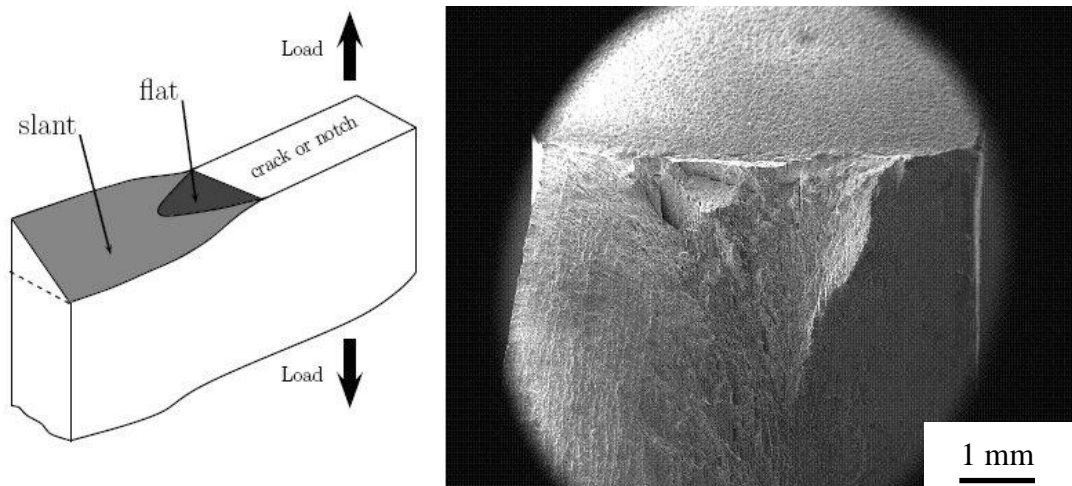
Schematic view of the Kahn fracture surface (left) and observation of a actual Kahn fracture surface for T8F_6 sheet (right).
